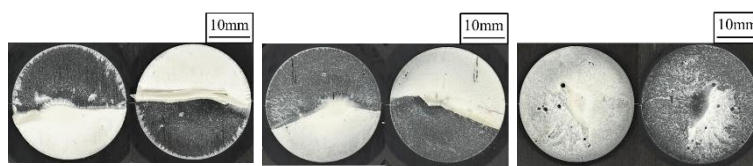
Fracture surface of DCB and ENF tests.
